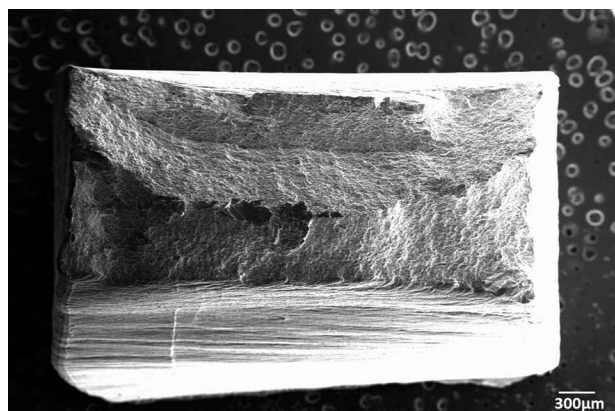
Fracture surface of a room temperature tensile-tested AA 3003 specimen tested in the transverse direction taken at low magnification
